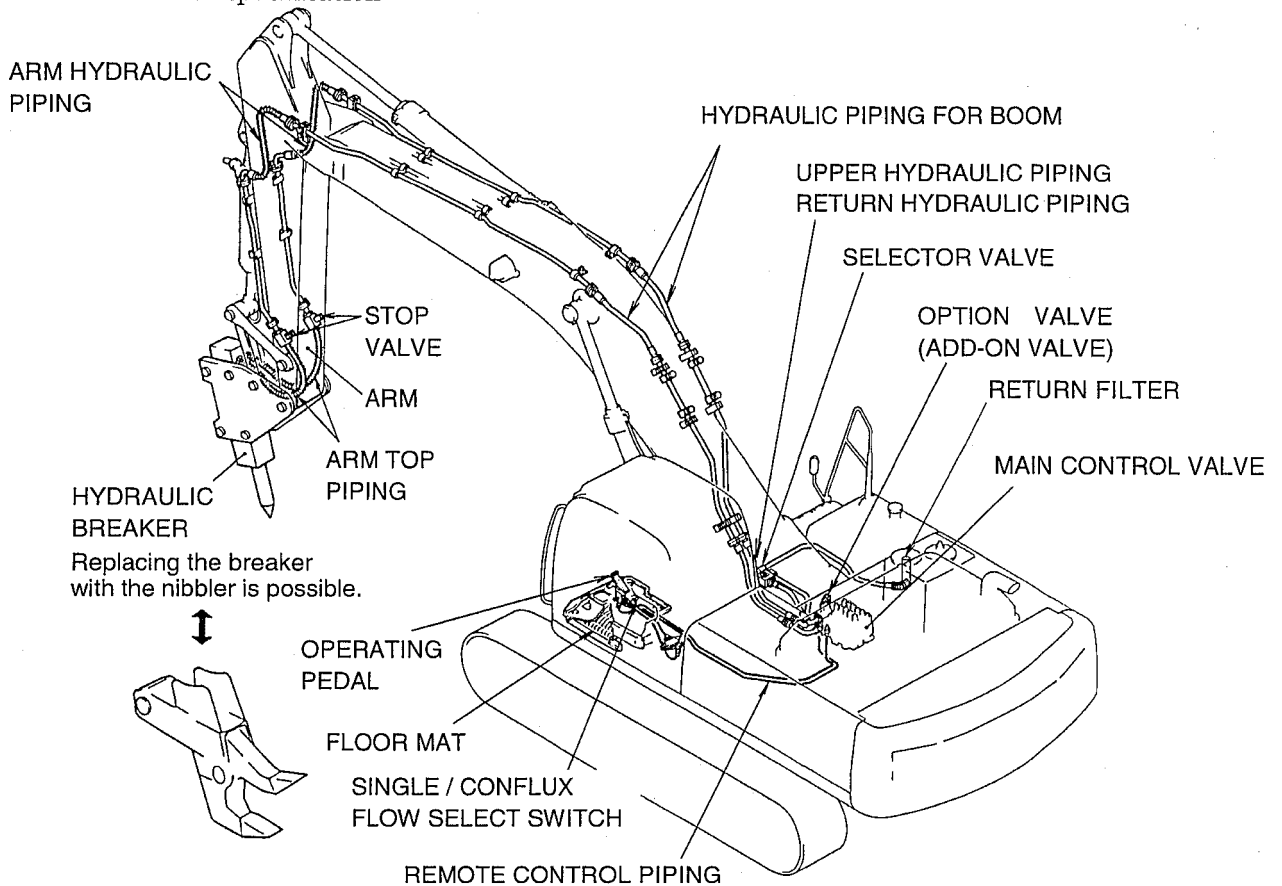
Outside view of Nibbler & Breaker-attached machine
